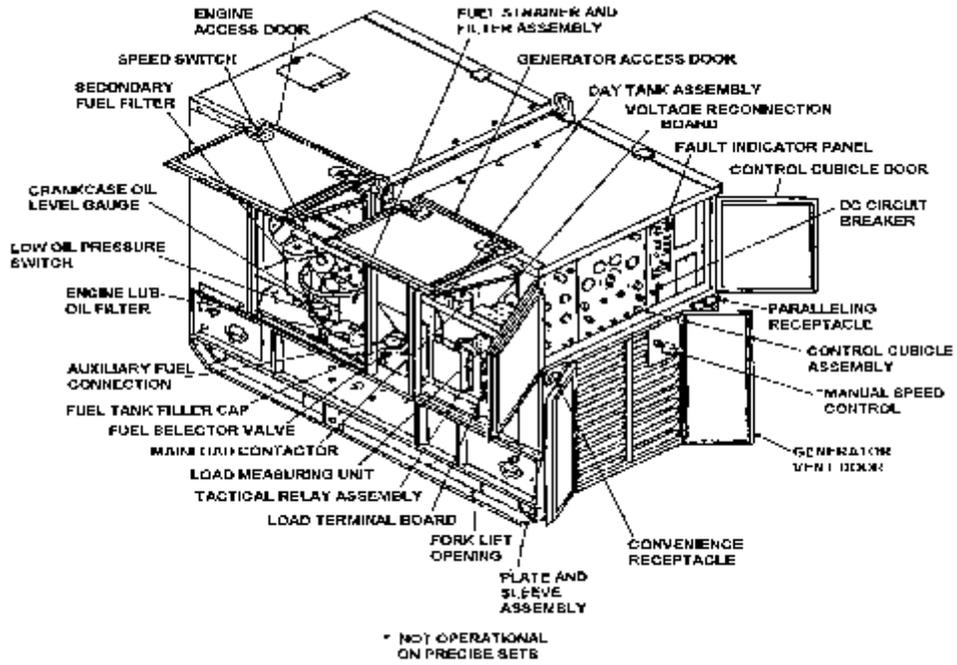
Example - engine generator set, right-front, three-quarter internal view.
